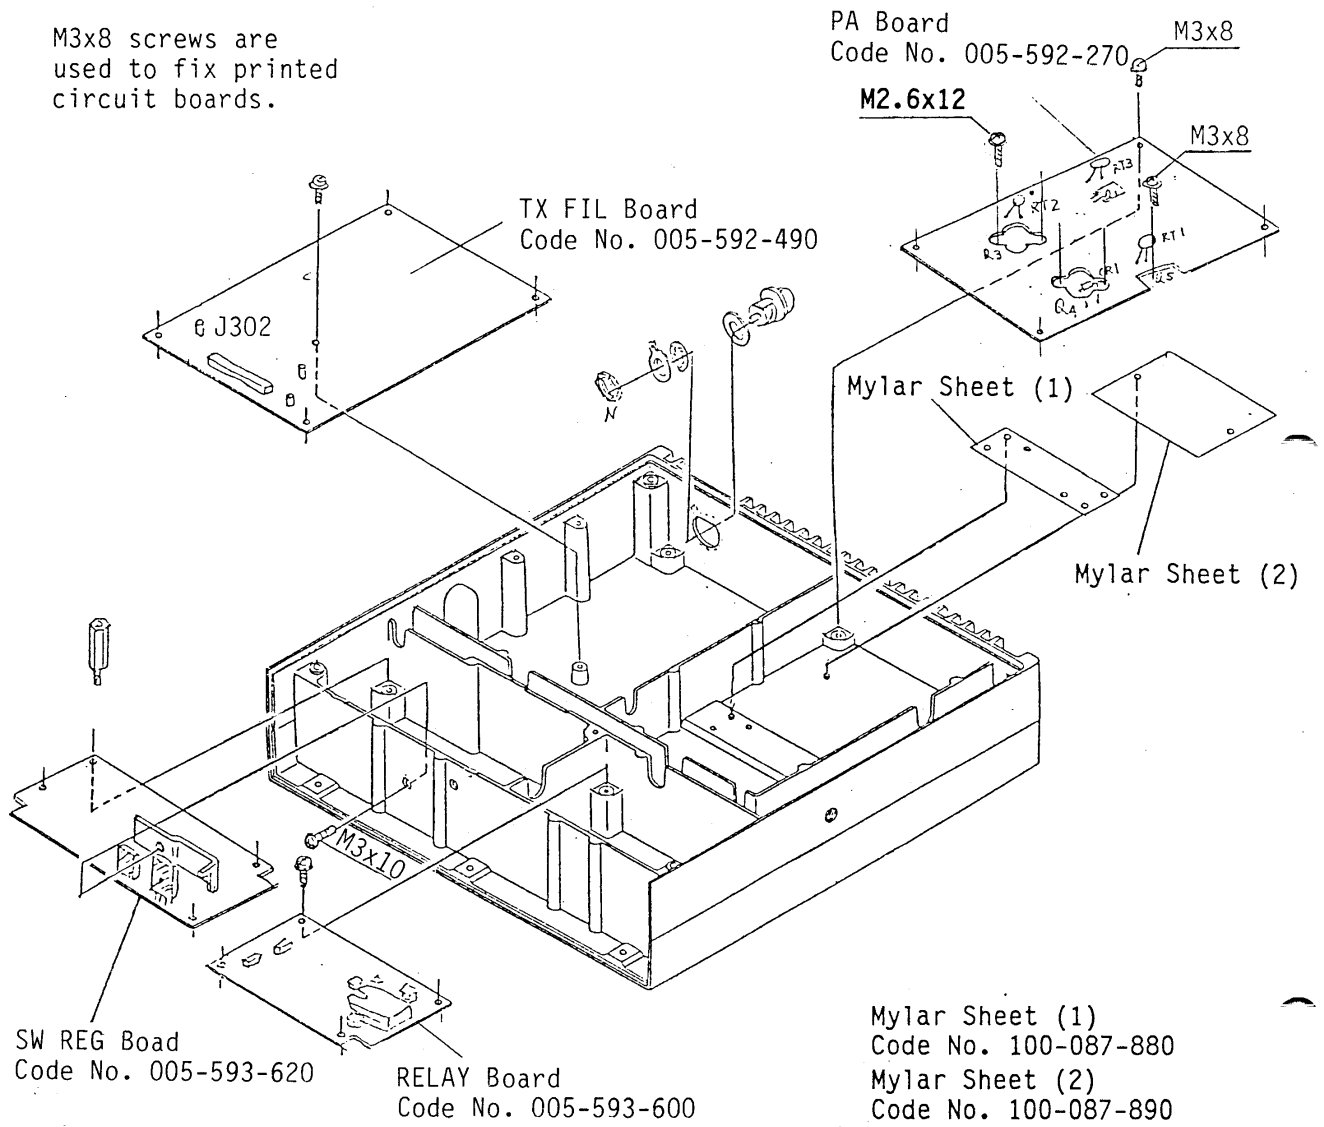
Disassembly of P.C. Boards from Top Chassis
